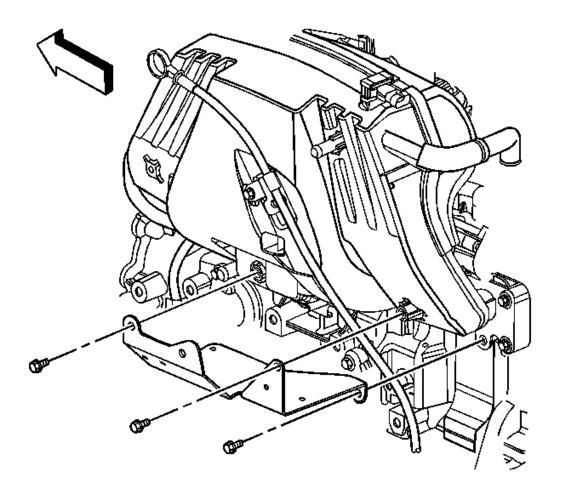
View Of Engine Wiring Harness Bracket Courtesy of GENERAL MOTORS CORP.
